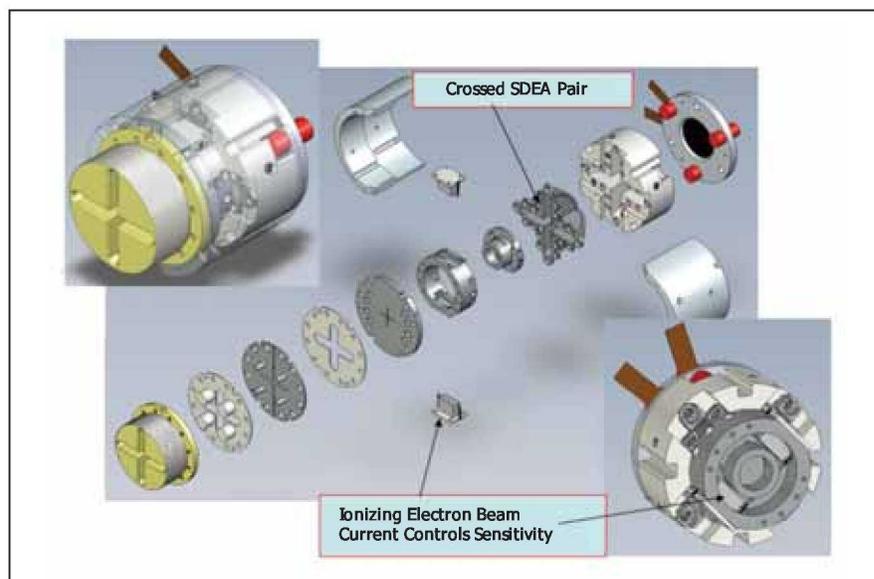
Drawing of the Crossed SDEA WTS assembled and in separate parts.
